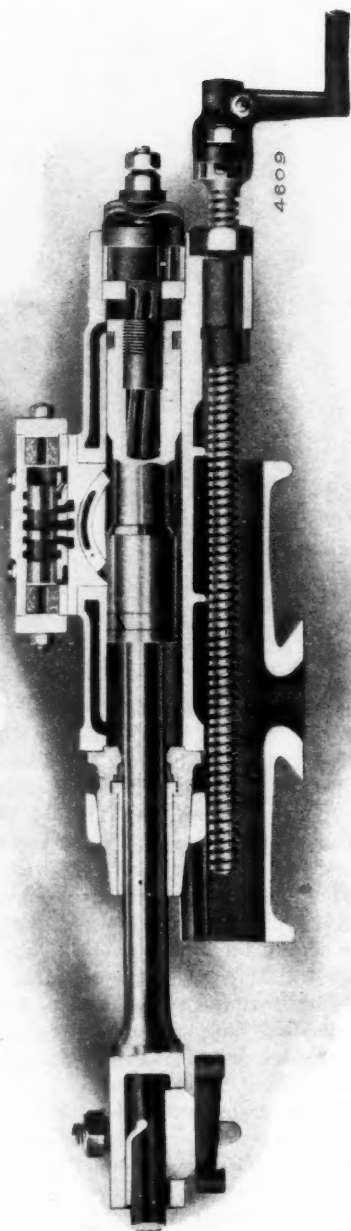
SECTION OF MOUNTED TYPE OF DRILL.
